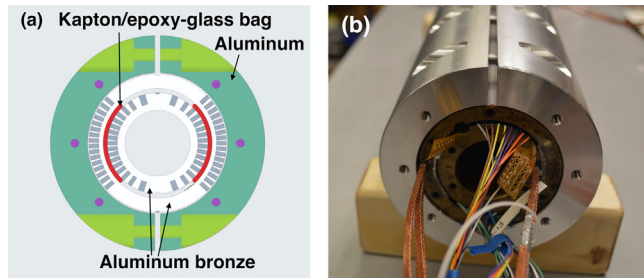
(a) Cross-sectional view of the assembled magnet. The red arc between two layers of coils is shims made of Kapton/epoxy-glass bags. (b) The as-assembled magnet.
